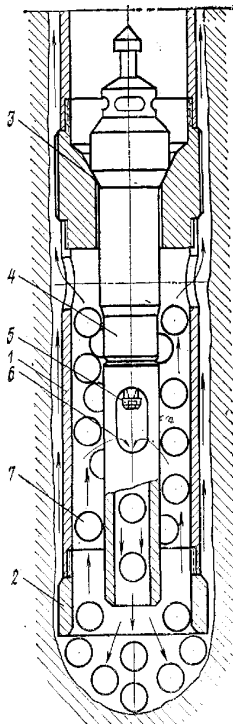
Pellet impact drill bit device with mechanical weapons of blade type:
